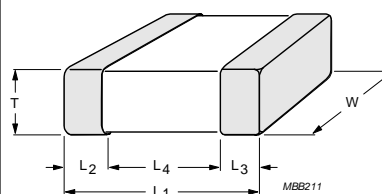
Surface mounted multilayer ceramic capacitor dimension
